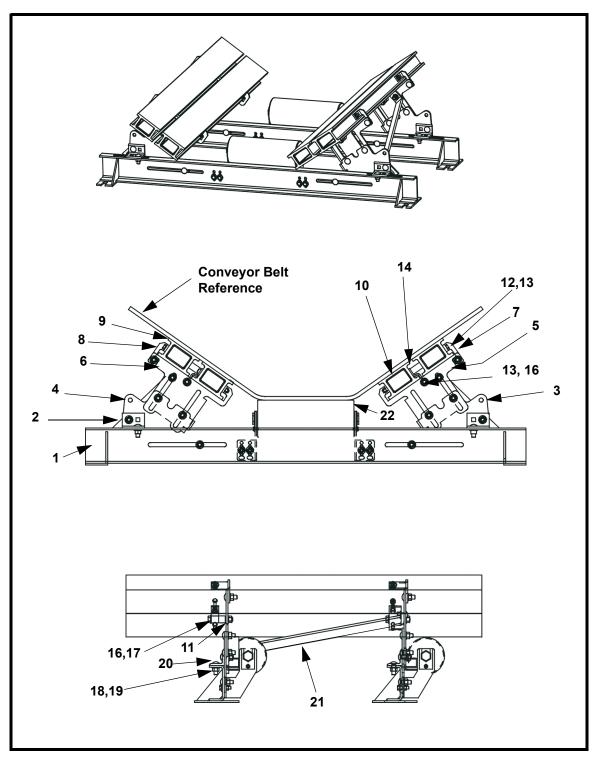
Martin[®] Slider Cradle Assembly (Double-Bar), P/N 36700-XXXXX
